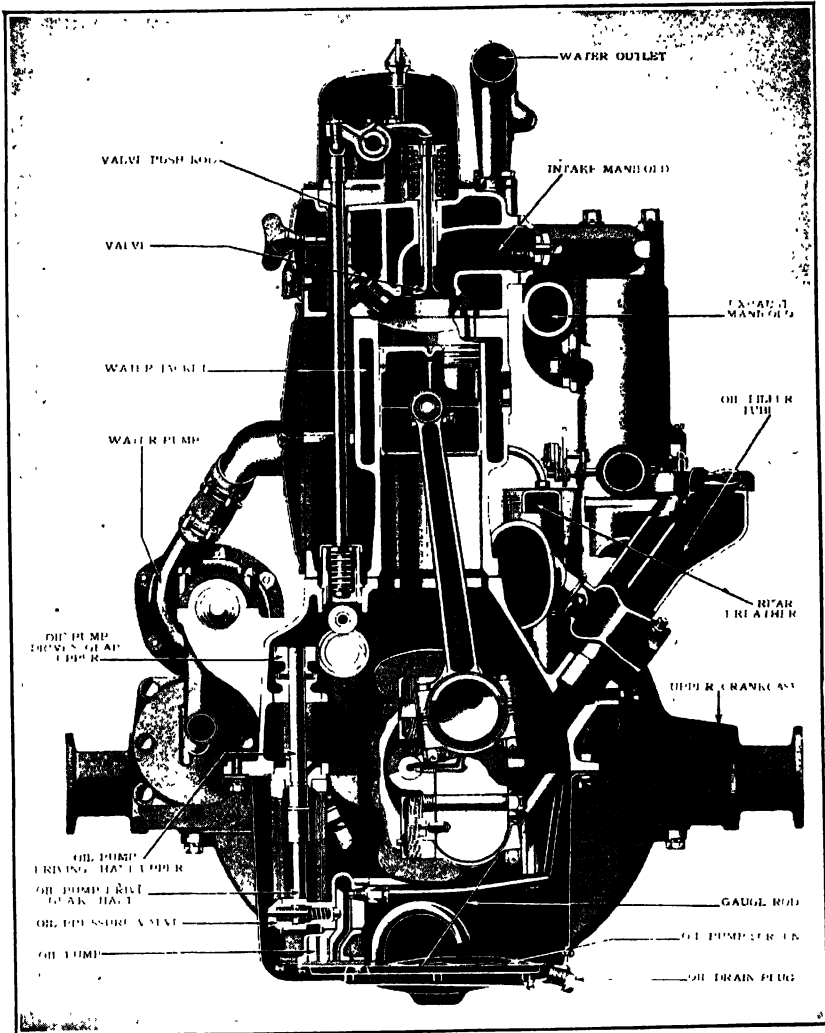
Valve Mechanism on Overhead Engine. (Buick.)
